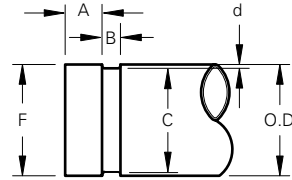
Roll grooved-end dimensional reference points for Table 1
